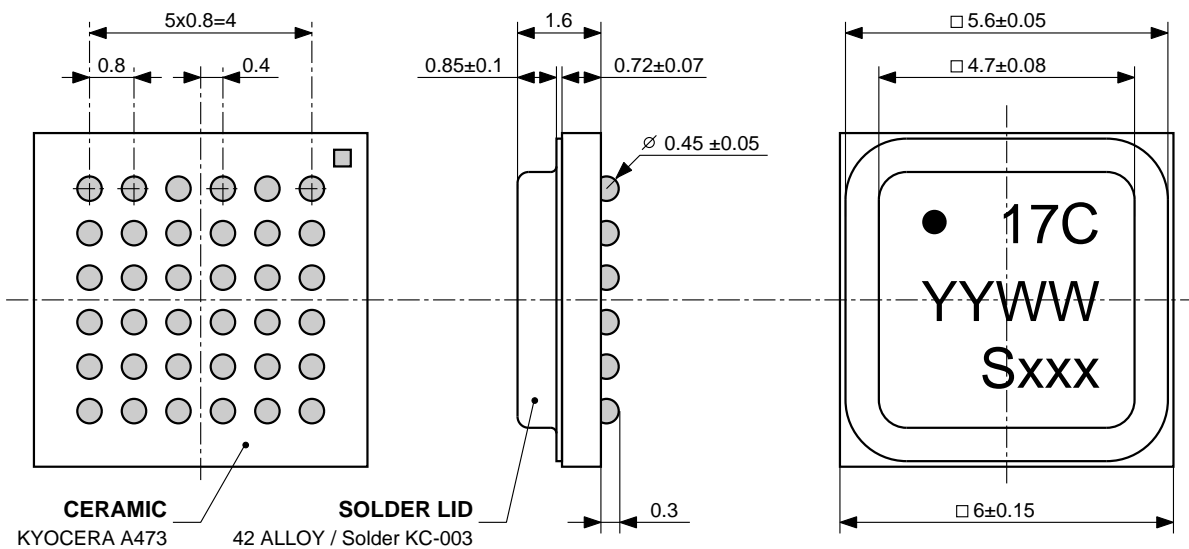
SY1017CS mechanical drawing (CBGA 36 balls).
